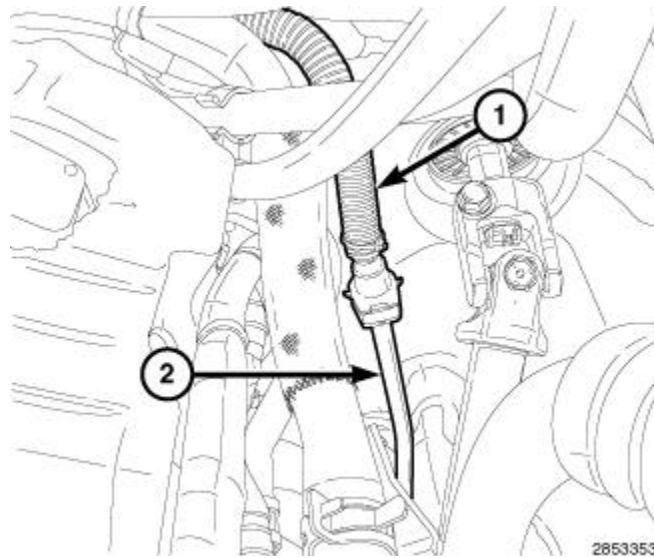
Fuel Supply Hose At Underbody Fuel Supply Tube
